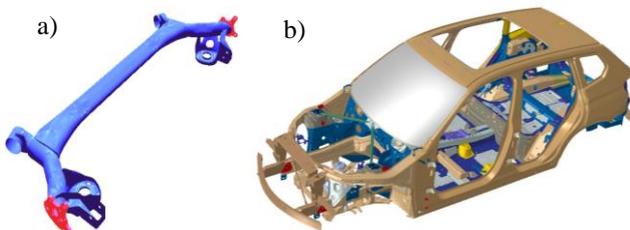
CAD models of: a) rear car axle; b) car chassis
